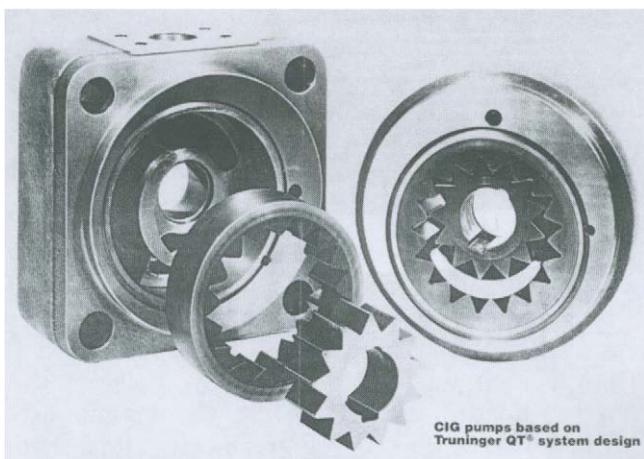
Gear pump (Courtesy of IMO Industries)
